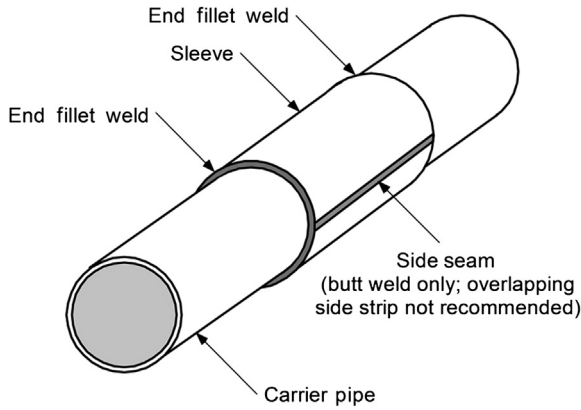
Type B full-encirclement repair sleeve: structural reinforcement and pressure containment.
